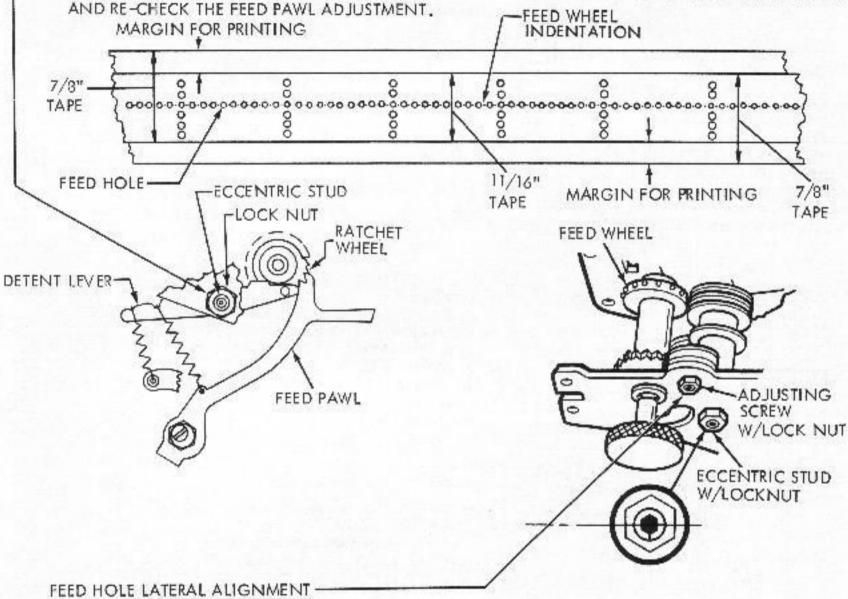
PERFORATOR MECHANISM FOR FULLY PERFORATED TAPE WITH INDENTATION OF THE FEED WHEEL BETWEEN THE FEED HOLES
